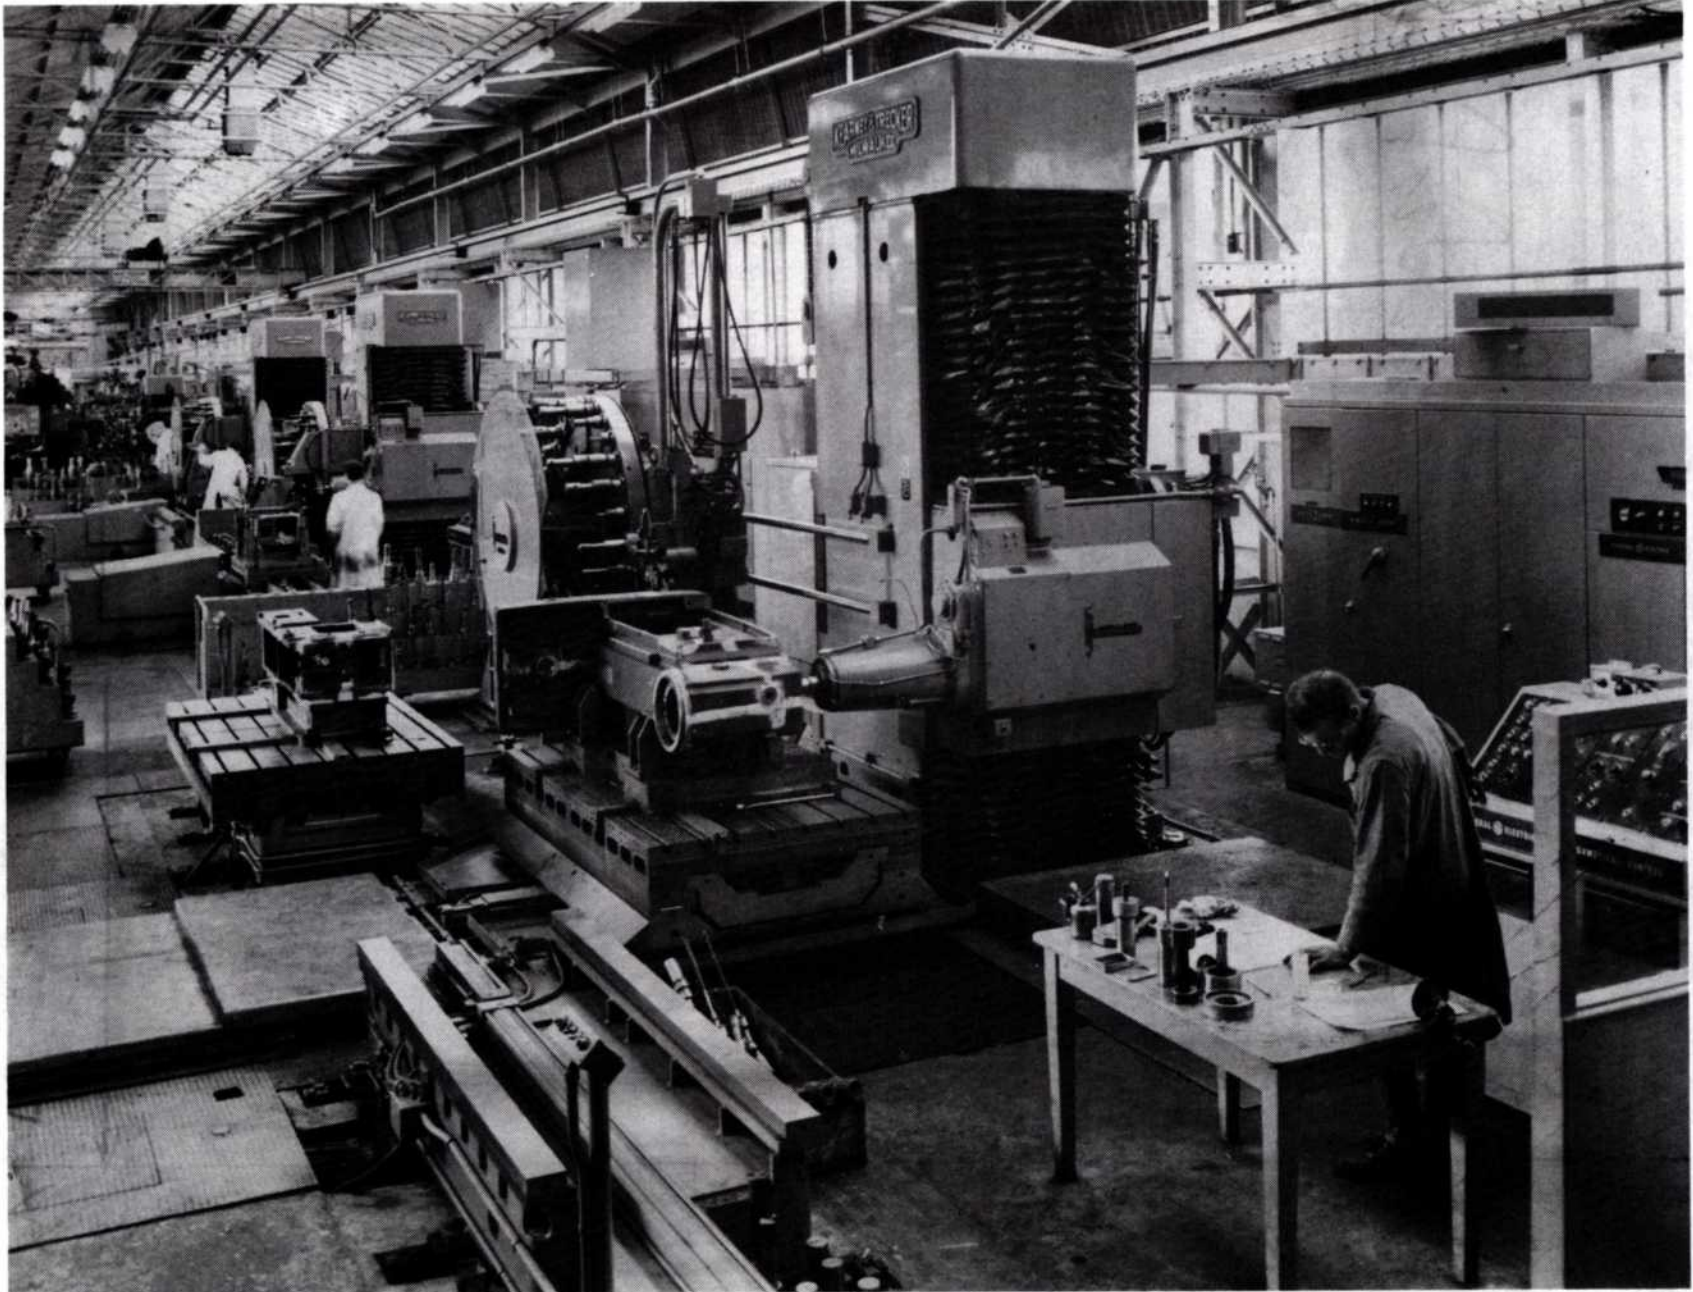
Kearney & Trecker (Milwaukee) "NC" machines machining castings – Littlehampton factory
